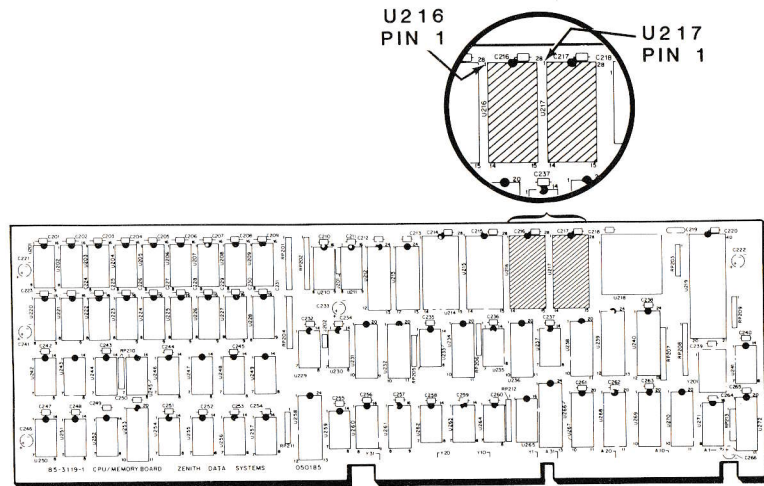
CPU/RAM Card (PCB Part No. 85-3119-XX)
